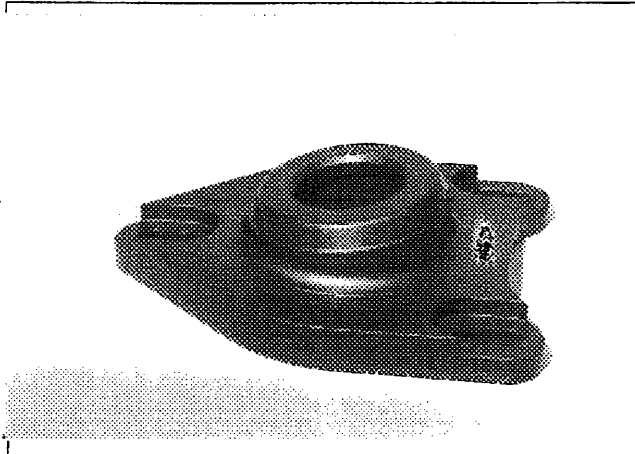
REAR REINFORCED TOP MOUNTING PLATES
